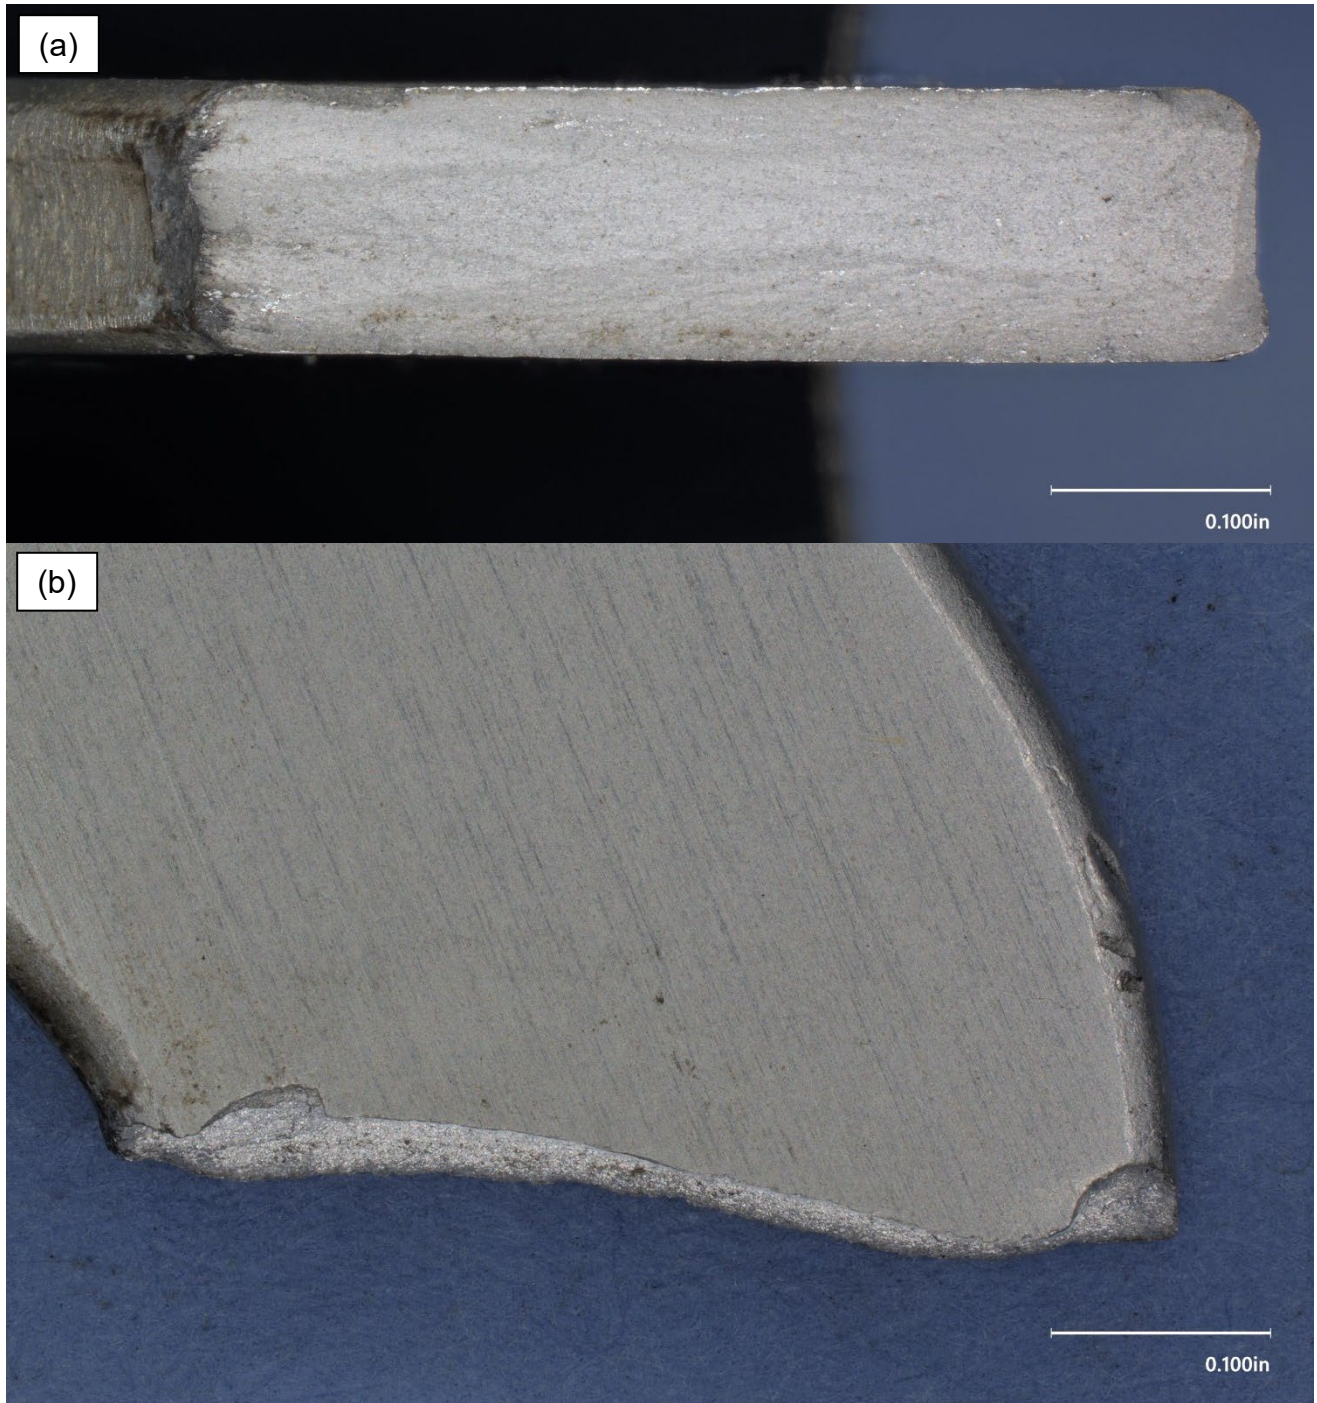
View of the A clip fracture surface on the non-riveted arm from (a) the surface and (b) the side, as received.
